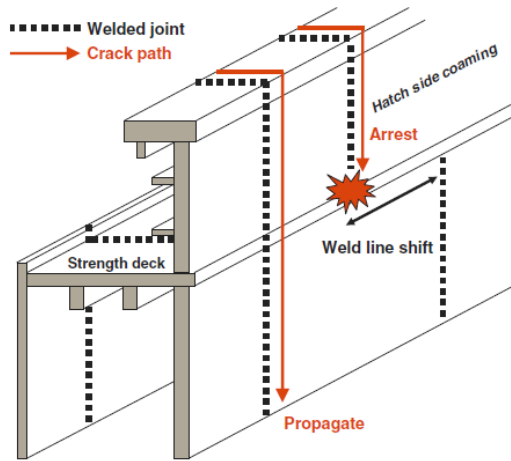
Concept of weld line shift (Sumi et al., 2013)
